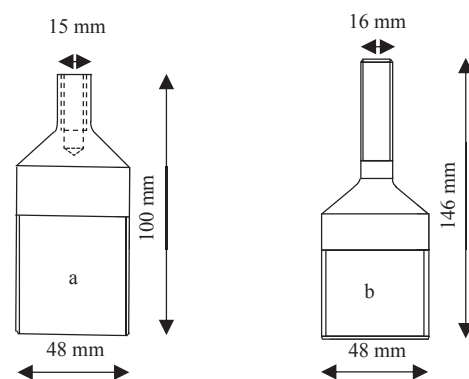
Test Piece Configuration for (a) Thread Milling and (b) Thread Turning Trials
